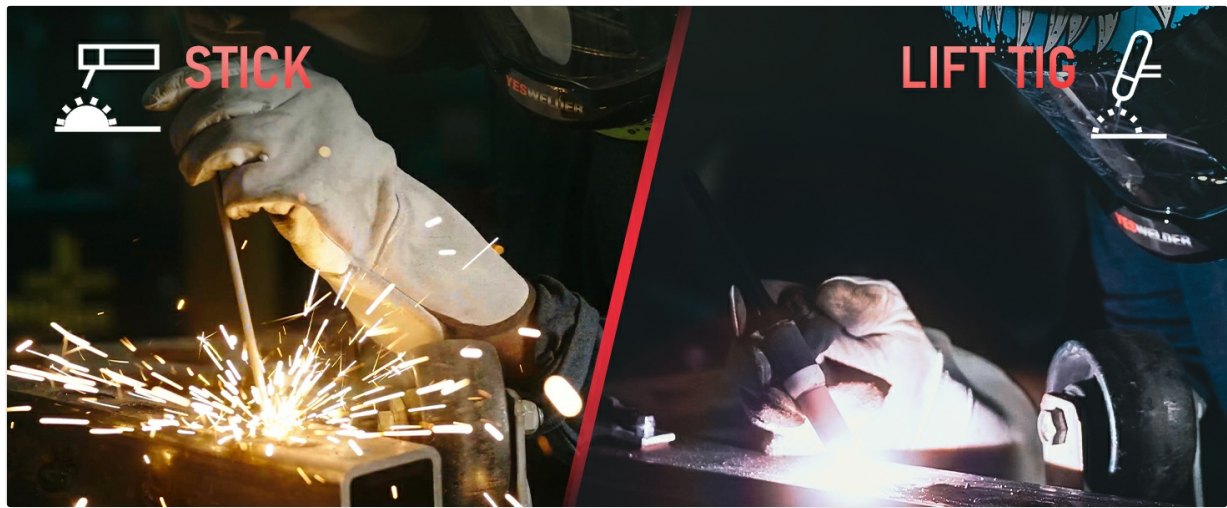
Visual representation of Stick welding (left) and Lift TIG welding (right).
